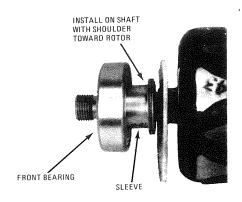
FRONT BEARING & SLEEVE ASSEMBLY (HA/8HA SERIES)
